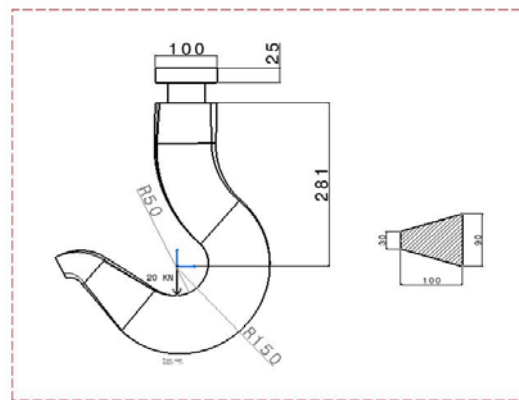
Design of Crane Hook with Trapezoidal C.S.A
